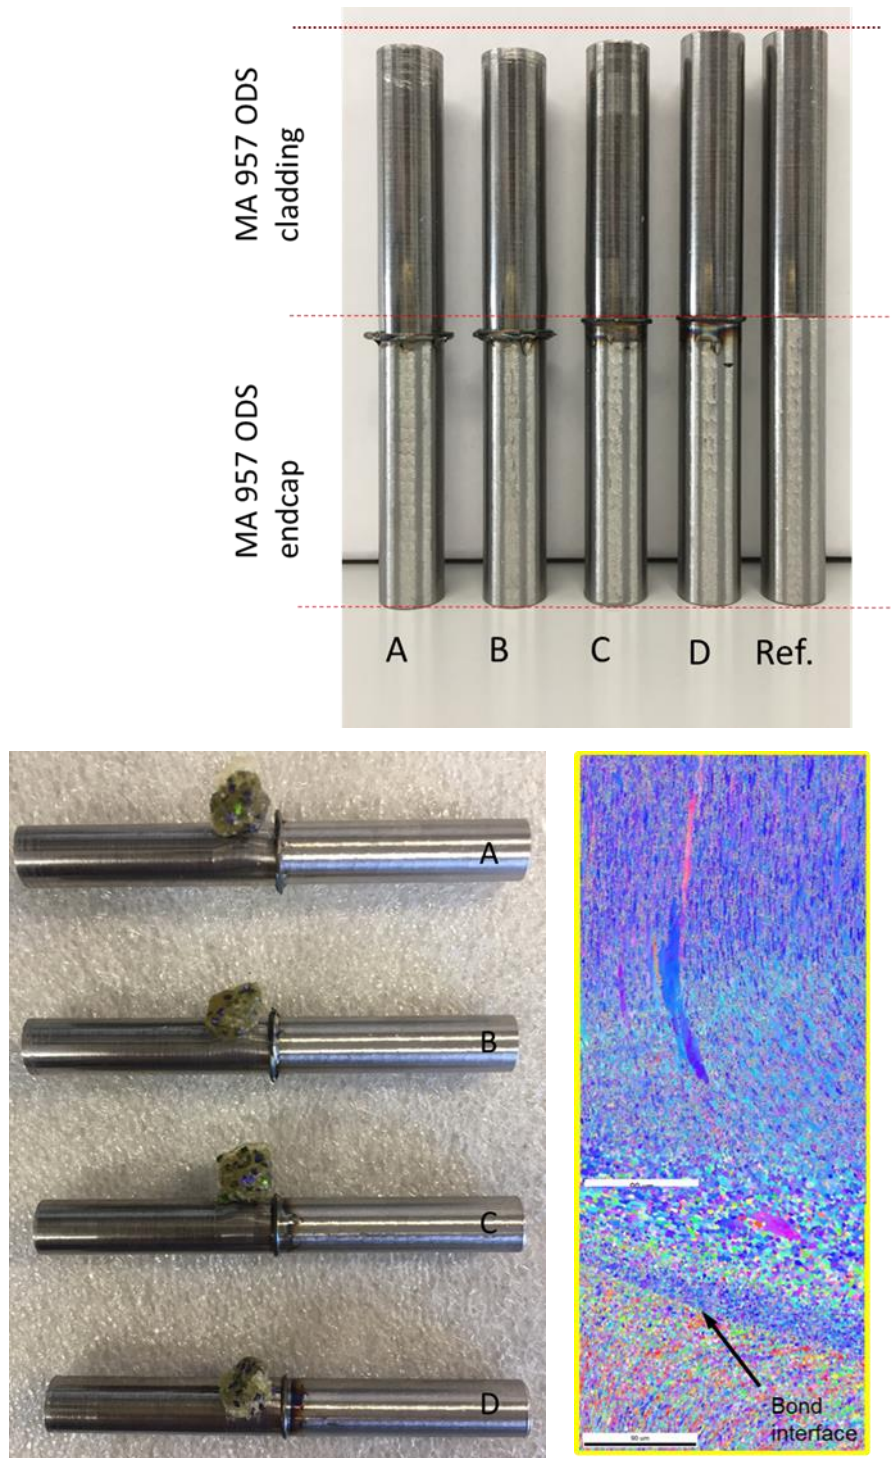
As-weld, pressure burst test, and the EBSD map of the PRW weld zone (right) with a scale bar of 90 μm .
